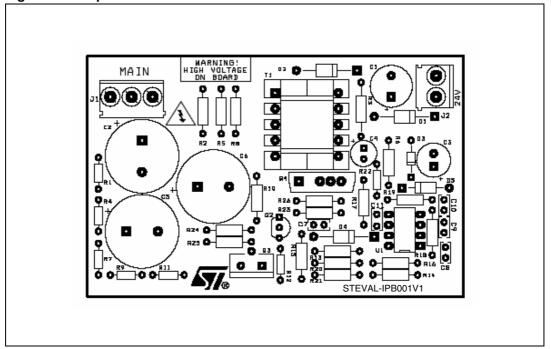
Top view of the STEVAL-IPB001V1 demo board
